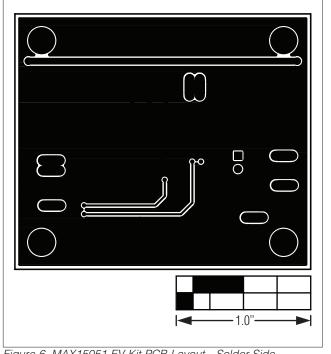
MAX15051 EV Kit PCB Layout—Solder Side
